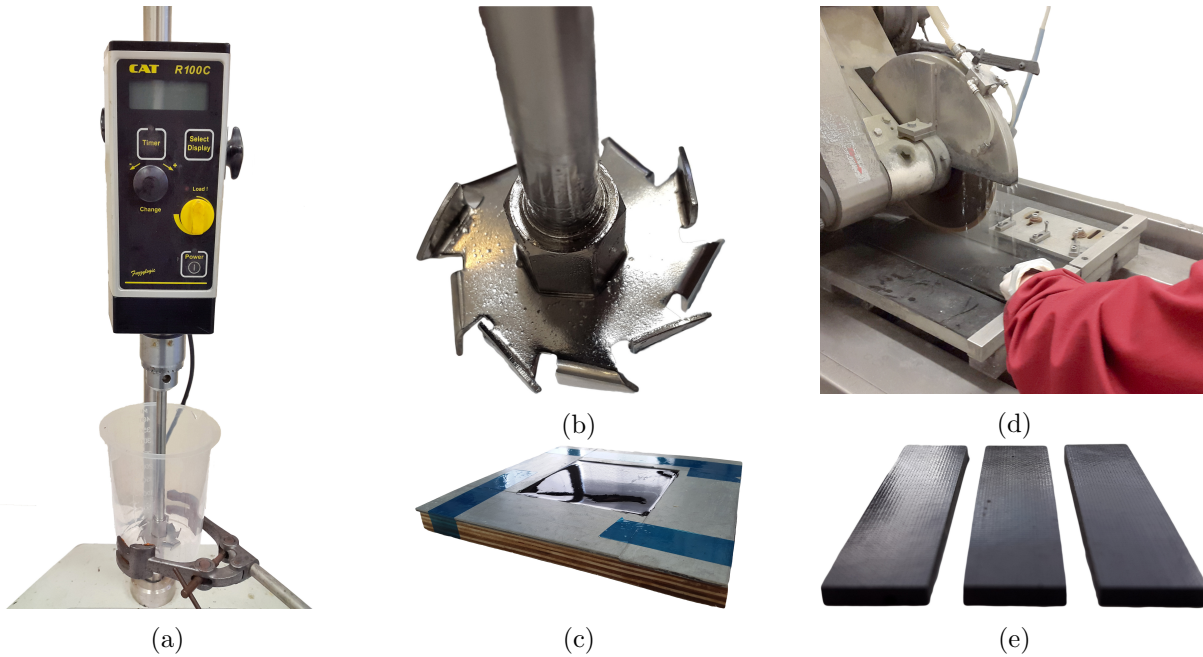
(a) Mechanical stir machine, (b) stirrer blade, (c) mold with nano loaded resin, (d) samples cutting process the samples at INEGI Porto and (e) three samples.
